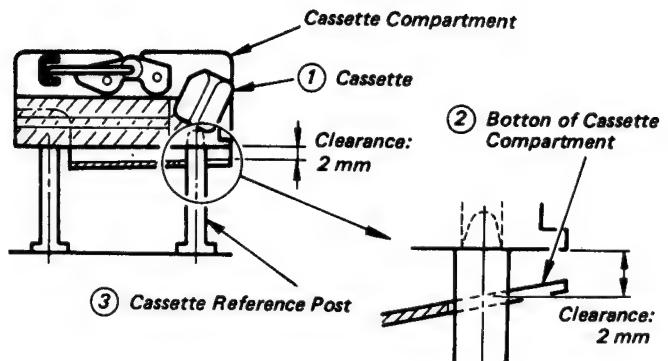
Clearance Between Cassette Bottom and Cassette Compartment Bottom
